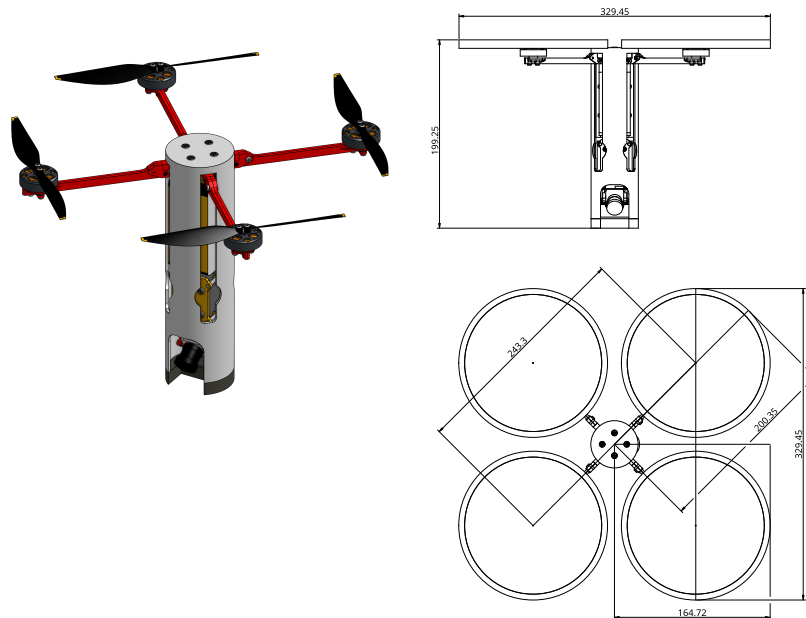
Three-view drawing of quadcopter in deployed configuration at maximum operating empty mass (MOEM). Dimensions shown in millimeters.
